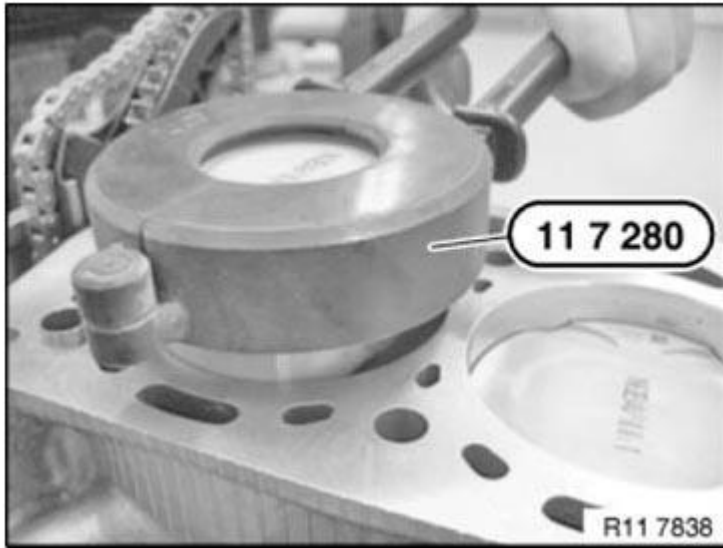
Compressing Piston Rods With Special Tool 11 7 280
